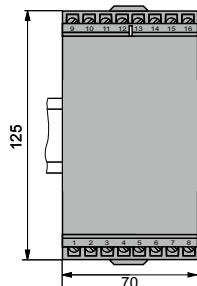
P11 in housing E16 clipped onto a top hat rail
